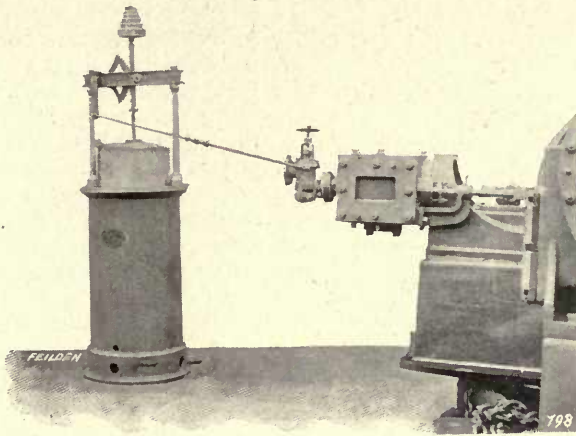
WALLER'S PATENT HYDRAULIC GOVERNOR, CONNECTED TO EQUILIBRIUM THROTTLE VALVE ON STEAM ENGINE DRIVING EXHAUSTER.
